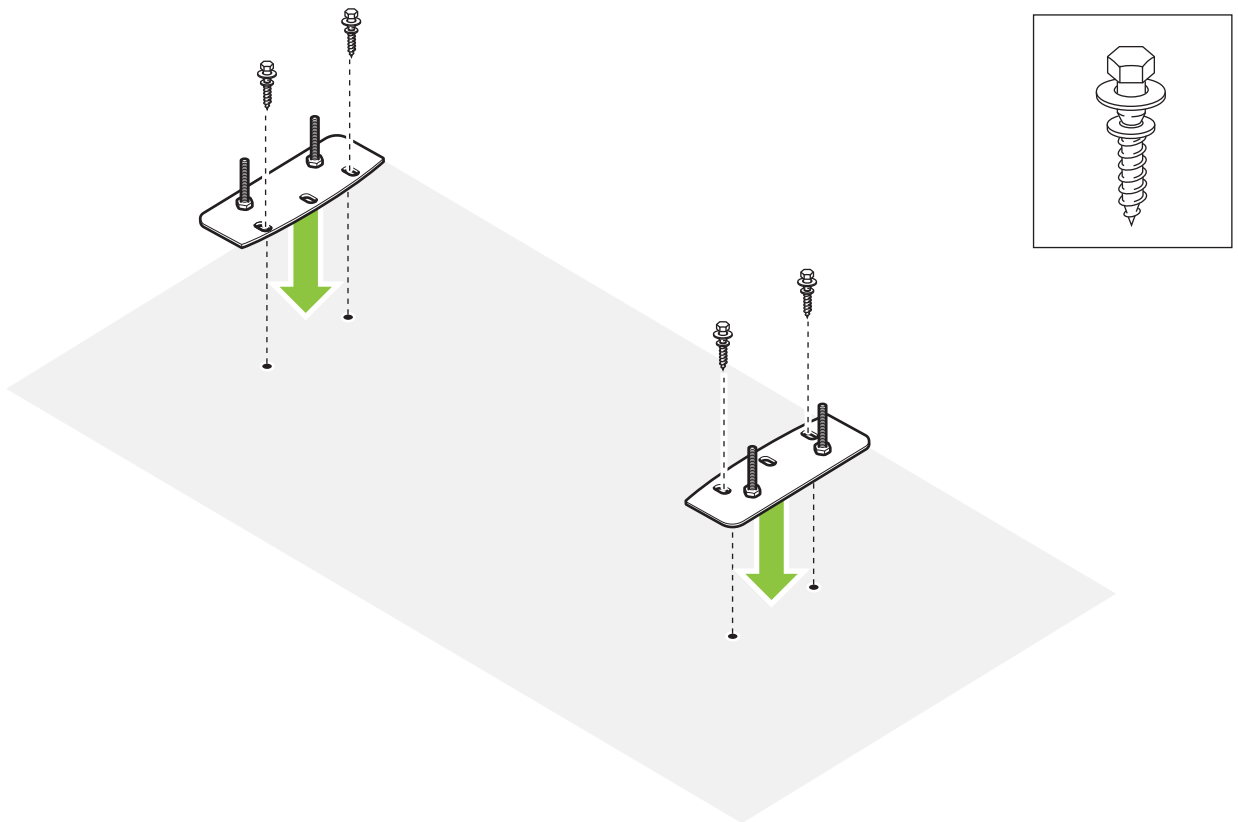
Floor Anchor for Wooded Floors on Bottom Landing
